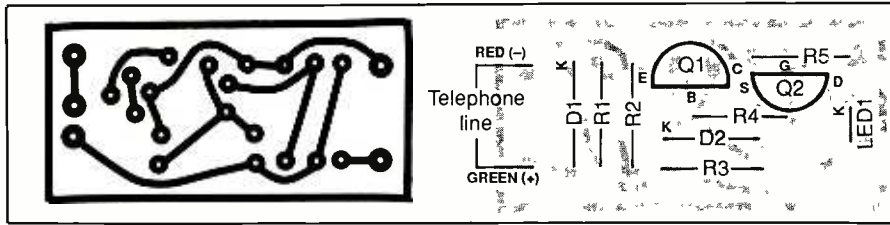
Actual-size etching-and-drilling guide (A) and wiring diagram (B) for Extension Phone Busy Indicator pc board.
